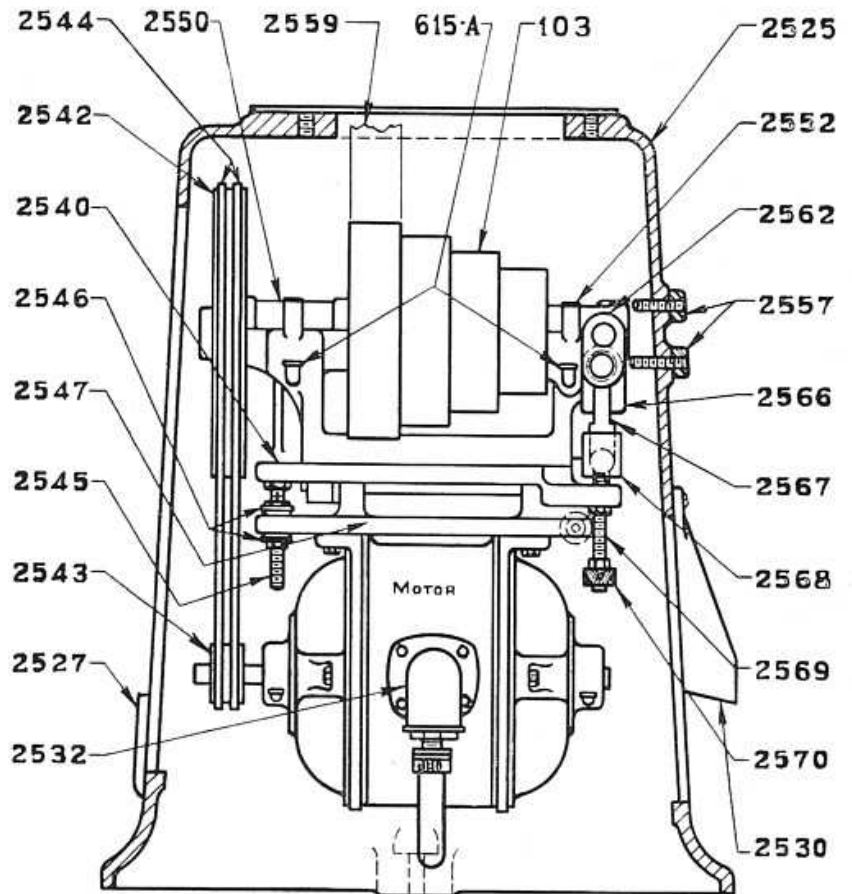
Front View Drawing Showing Position of Parts of Underneath Belt Motor Drive Unit in Assembly.
